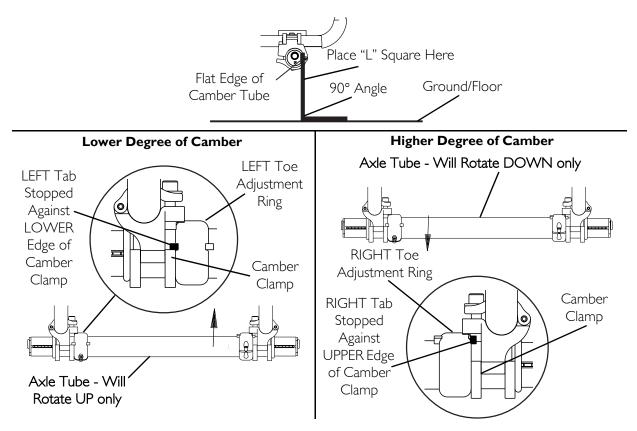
Adjusting the Axle Tube - A4 Camber System
